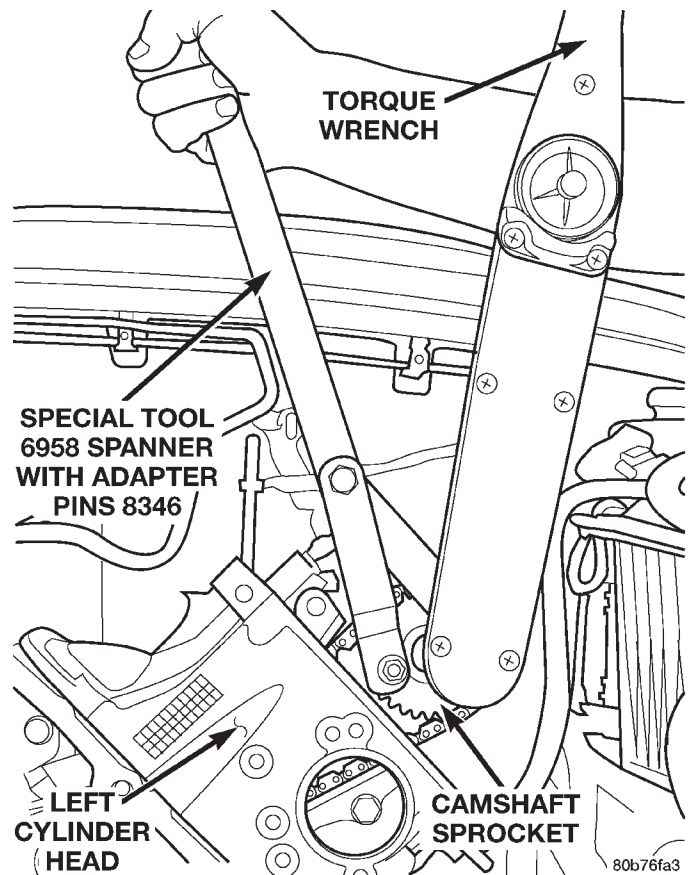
Tightening Left Side Cam Sprocket Retaining Bolt
